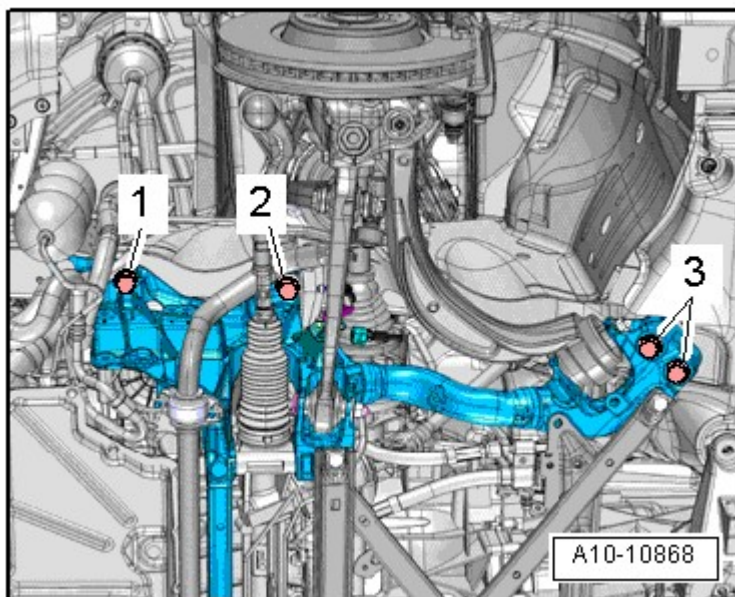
Identifying Subframe Bolts (Tighten To Specifications)
